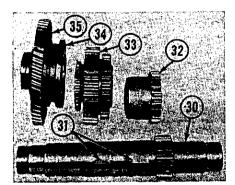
Dismantled countershaft from tractor having dual plate clutch. Note the hollow shaft. Refer to Fig. 108 for legend.
